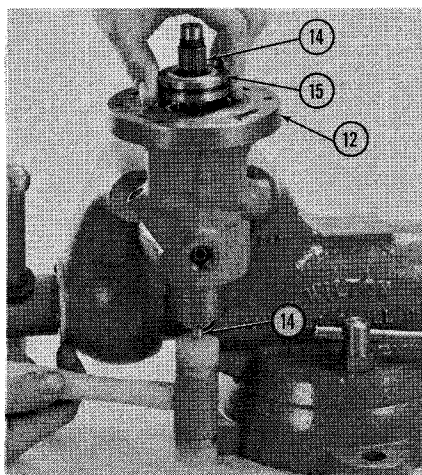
Tap on outer end of actuator shaft (14) to bump bearing support (15) from the housing (12).
